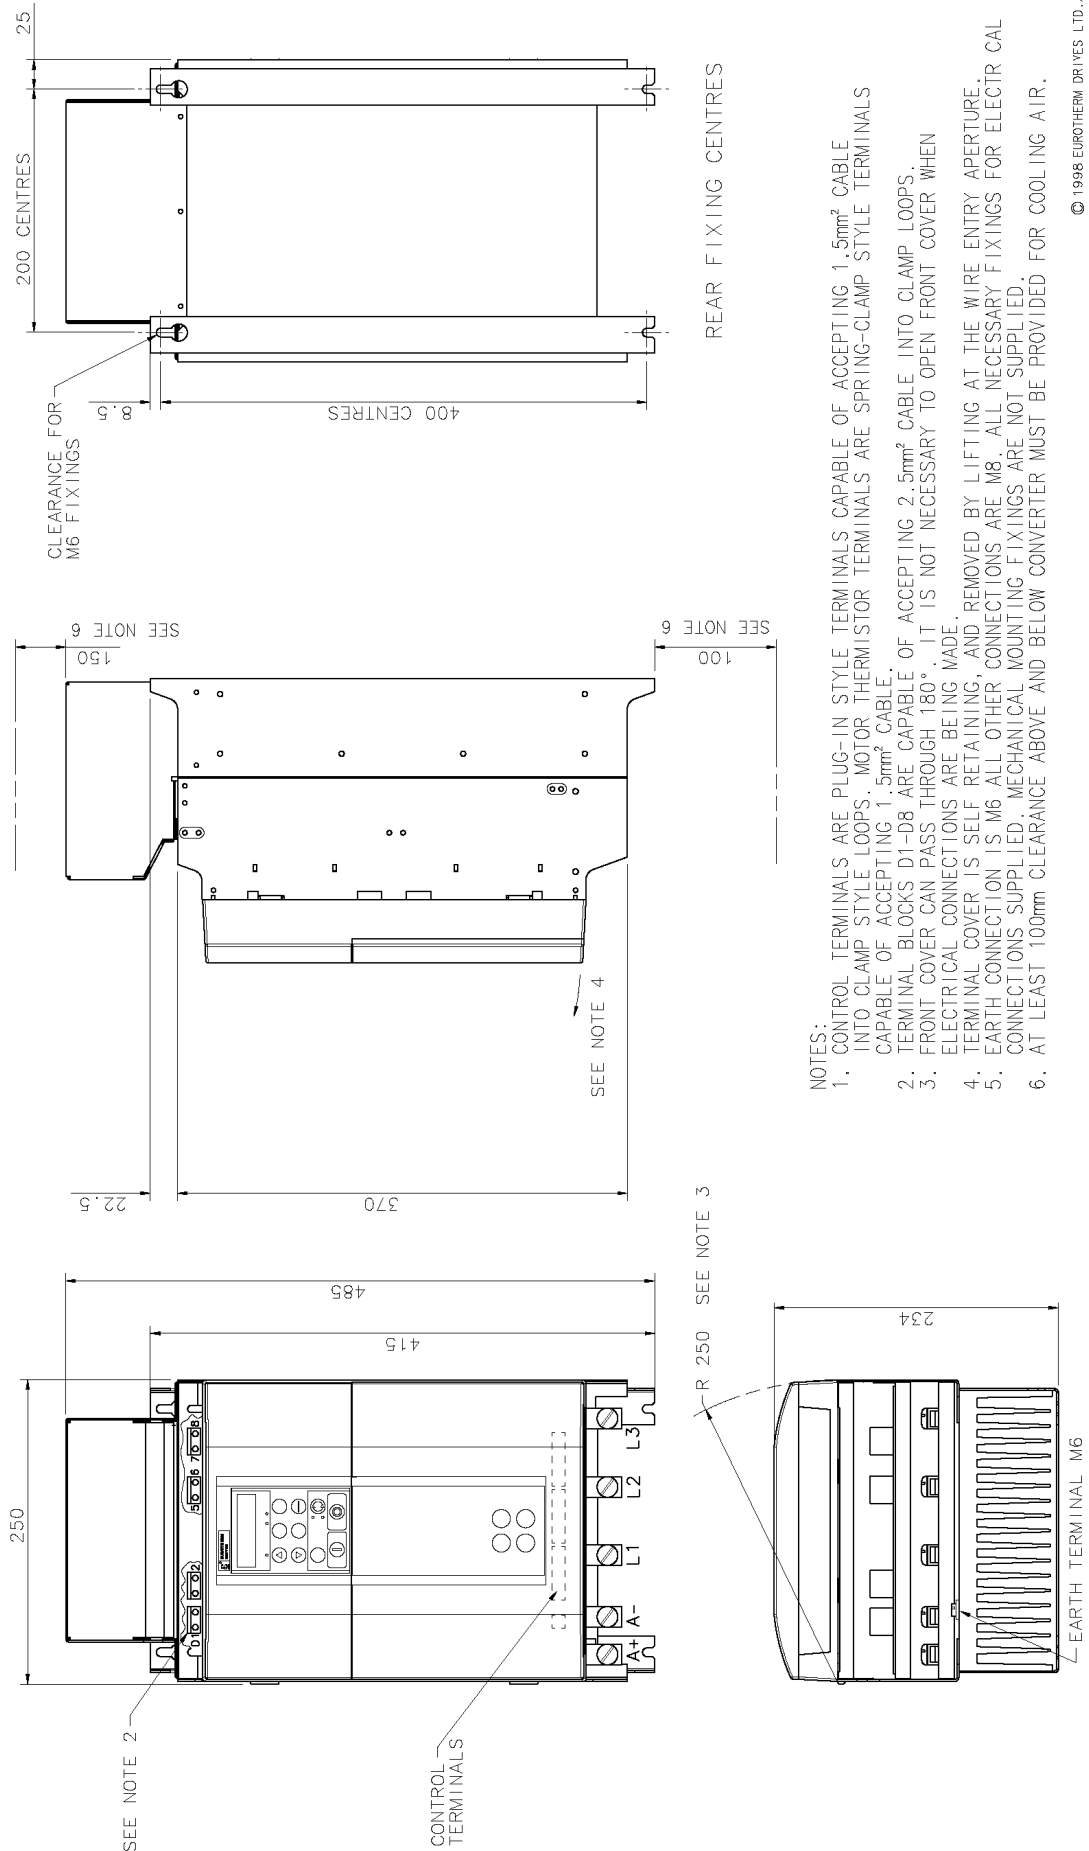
Frame 3 : 180A Stack Assembly - Drg No. HG466427
